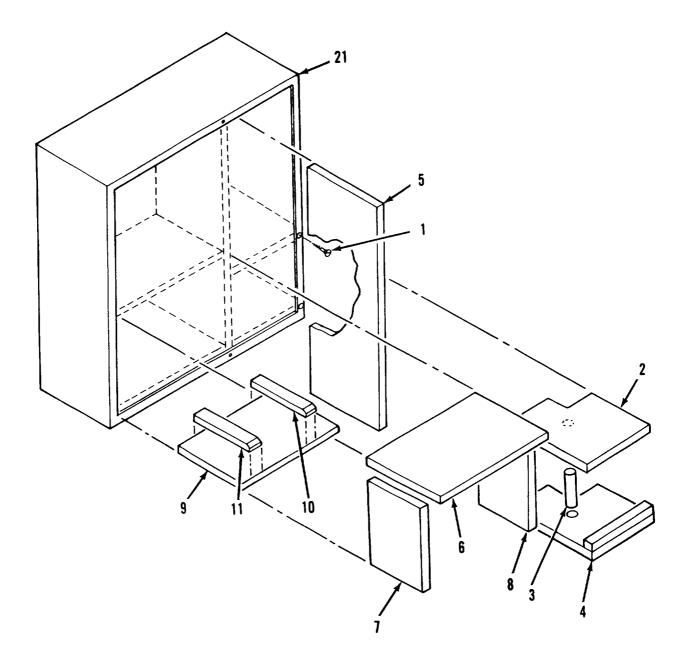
Right Cabinet Door Divider and Lock Installation (Sheet 1 of 2).
